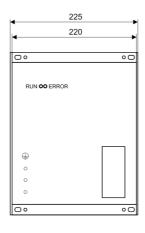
Dimensions of 20 Hz Generator 7XT3300-0BA00 for Panel Surface Mounting
